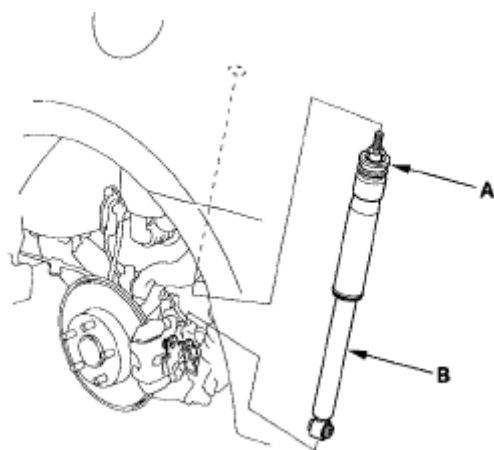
Identifying Damper Mounting Bushing Onto Damper Unit
